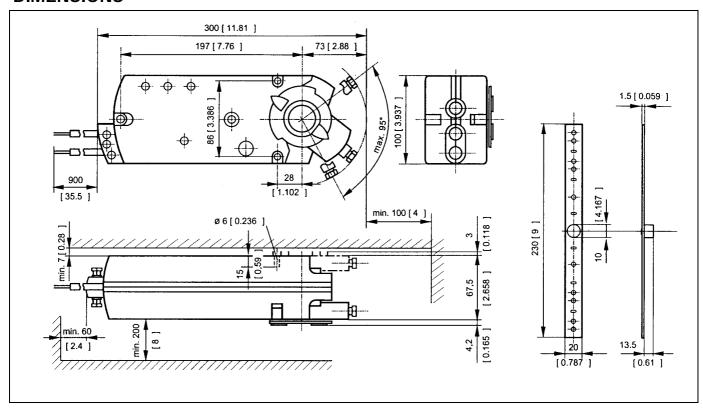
Dimensions ML4195E/8195E in mm [inch]
